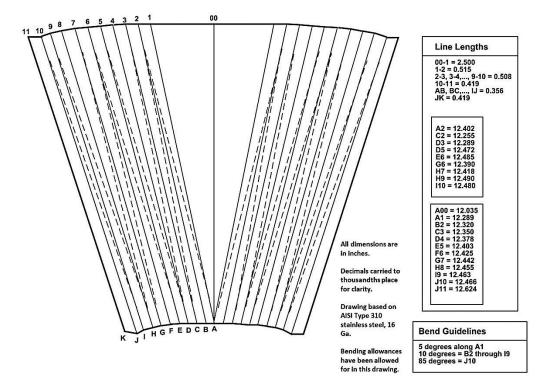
S-24. Burner Cone Layout and Bending Pattern
